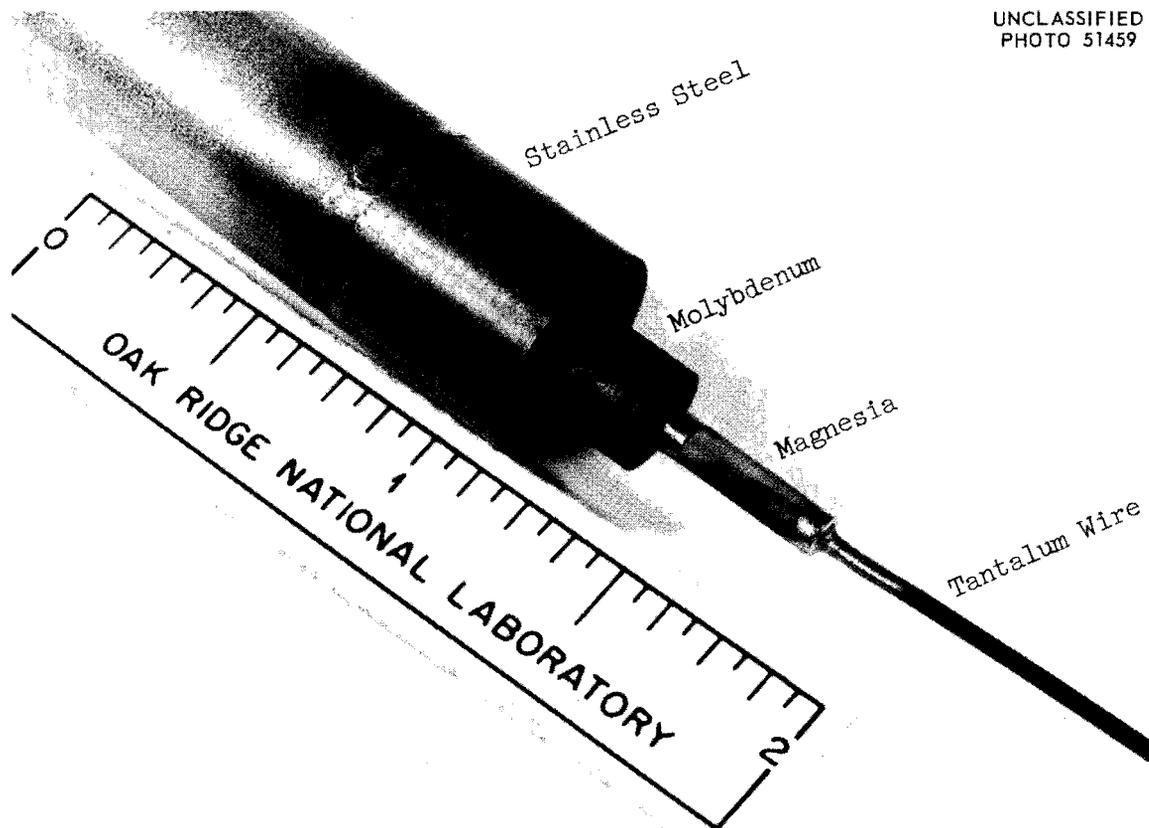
Brazed End-Cap Assembly Welded to Stainless Steel Capsule. A tantalum wire was insulated from a molybdenum adapter by magnesium oxide.
